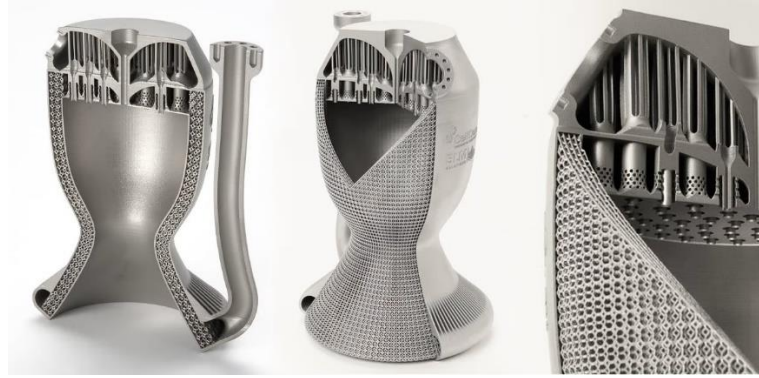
3D printed single-piece rocket propulsion engine. [2]
